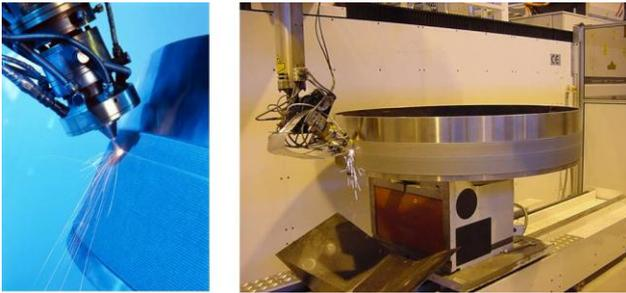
Laser cladding (courtesy of Kokkola LCC)
